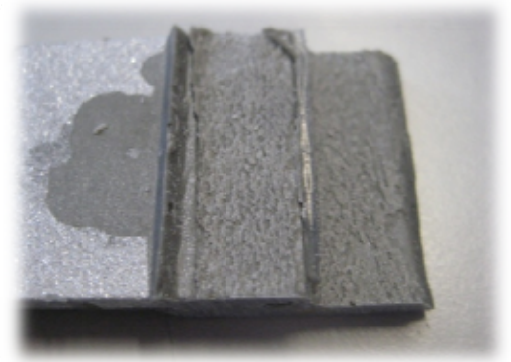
2015+AV138 30 DEGREES TAPER FRACTURE SURFACE
